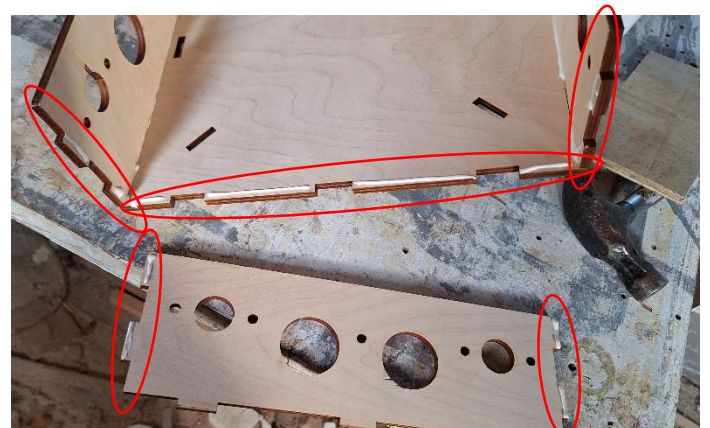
Bead of glue to the baseboard top, side stringers and end piece
